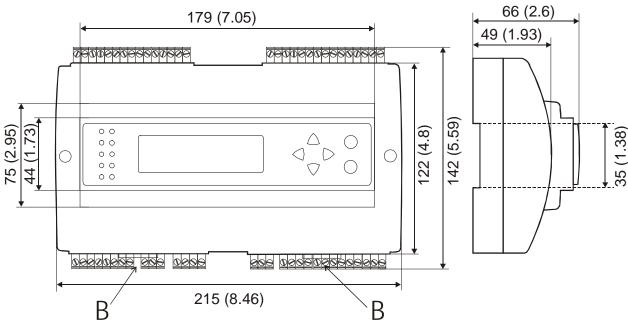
Mounting Dimensions for FX15 Controller, mm (in.) (Shown with Integral User Interface and Screw Connectors)
